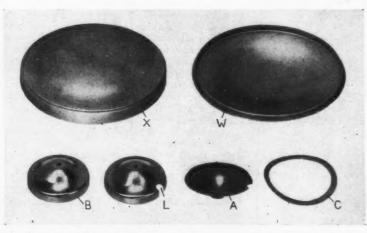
Production stages for a casserole cover W, and a jar cover A. Blanking, drawing and pinch-trimming and rim swaging tools are employed
